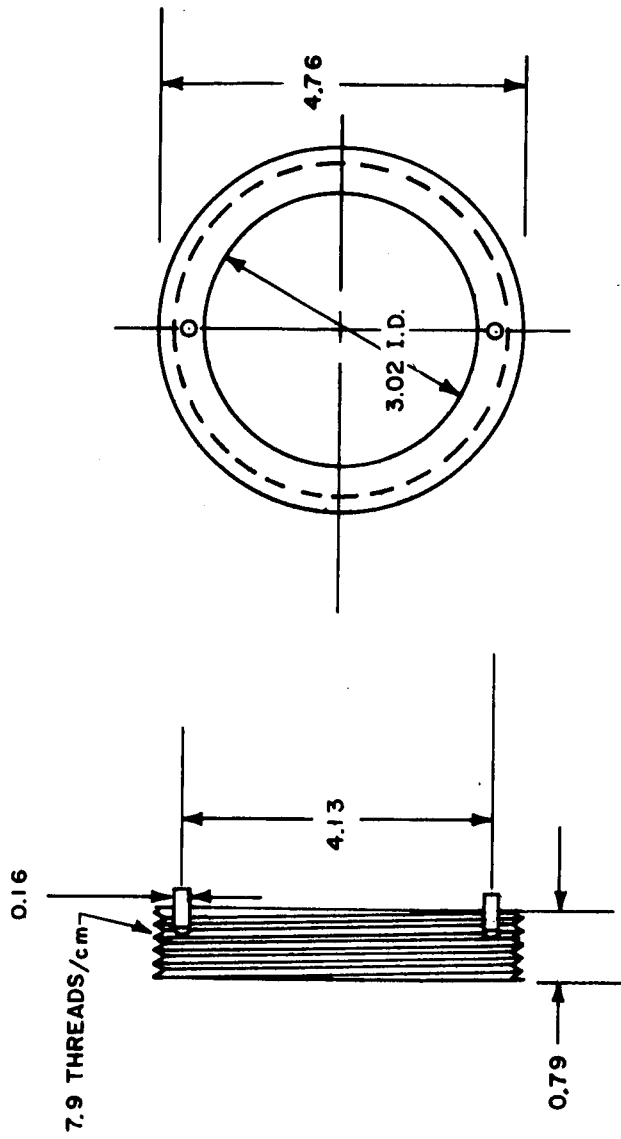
OUTLINE DRAWING, MULTIPLATE TARGET (TARGET CHAMBER)
